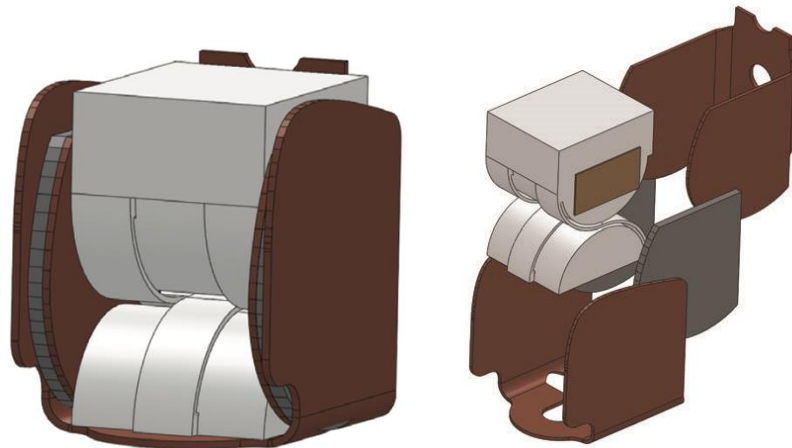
3D model of one of solder-activated joints for Squishbot 1 [13].
